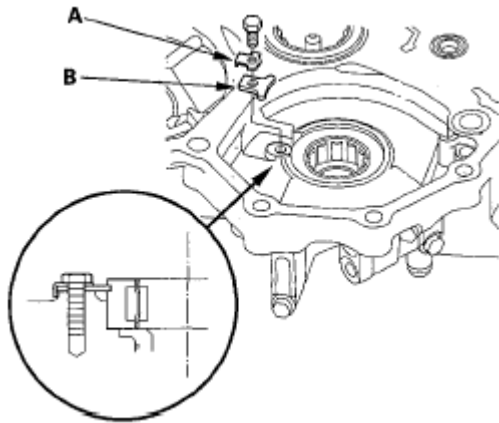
Identifying Lock Washer And Bearing Set Plate
